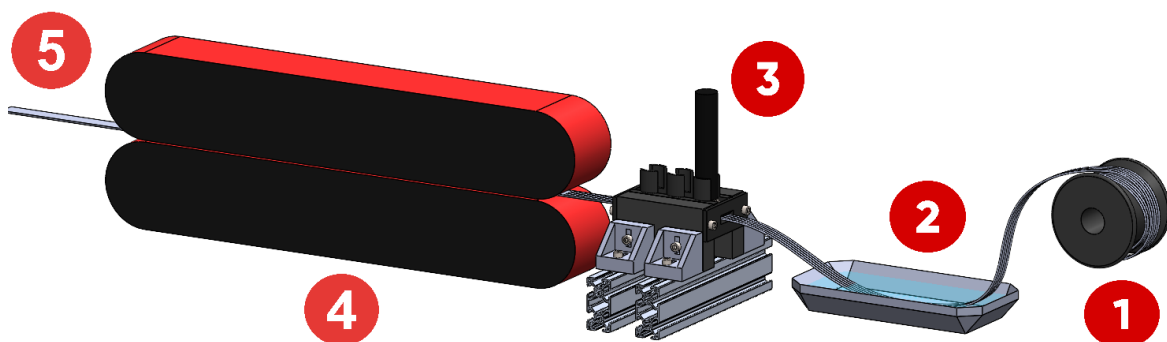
Sketch of UV Pultrusion line assembly.
